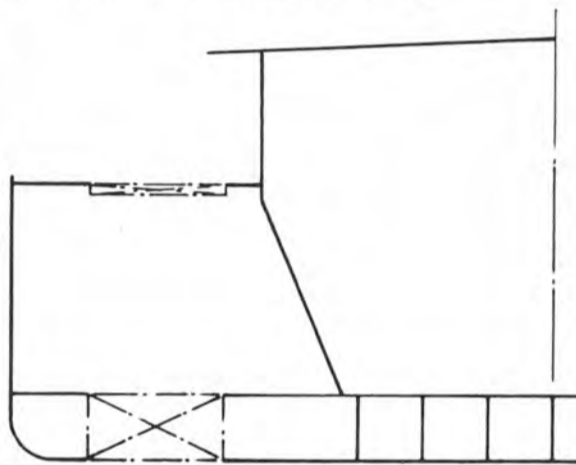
The main deck and bottom shell are cut longitudinally and girth cuts are made so that side shell sections can be moved outboard. Install new bottom shell, main deck sections, etc.
